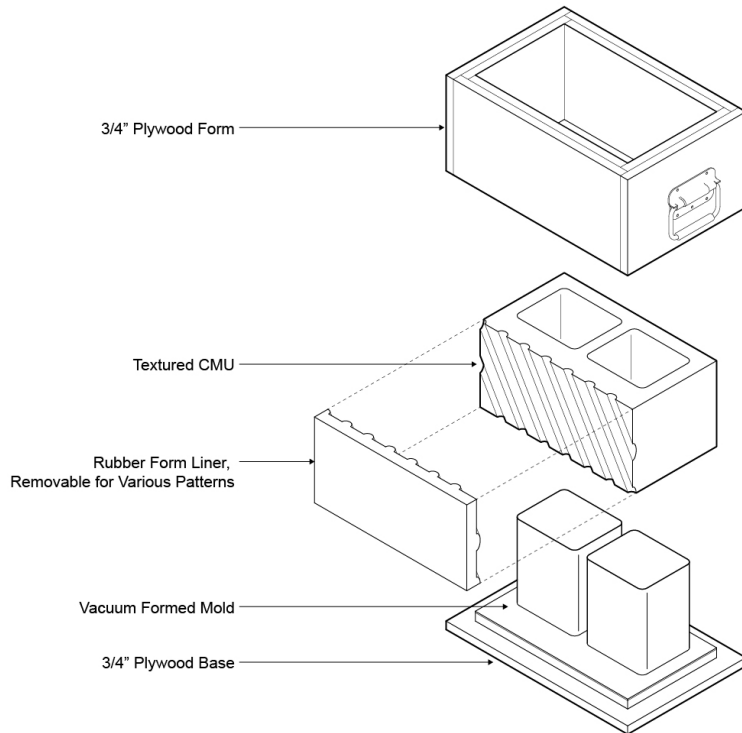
Exploded axonometric view of envisioned CMU block and replaceable form liner assembly.
